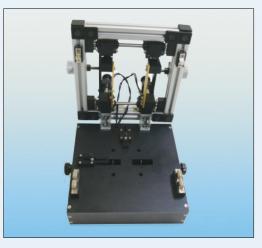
FRONT VIEW OF THE FIXTURE WITH TOP CONTACTS RAISED
